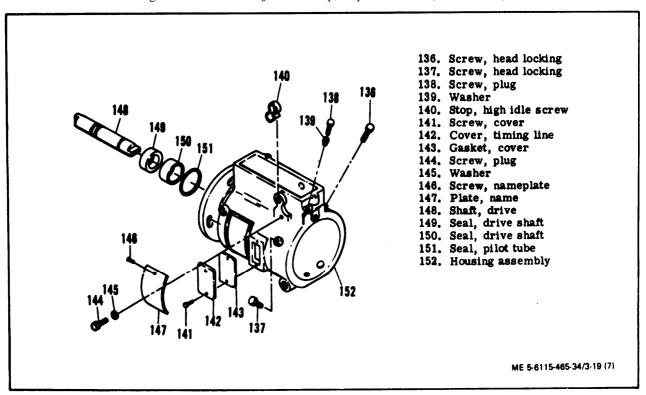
Fuel Injection Pump, Exploded View (Sheet 7 of 7)
